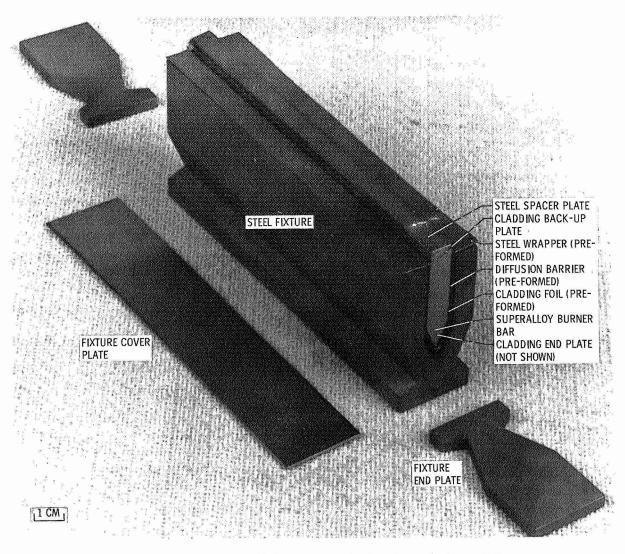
Component assembly for gas pressure bonding of superalloy burner bars.
